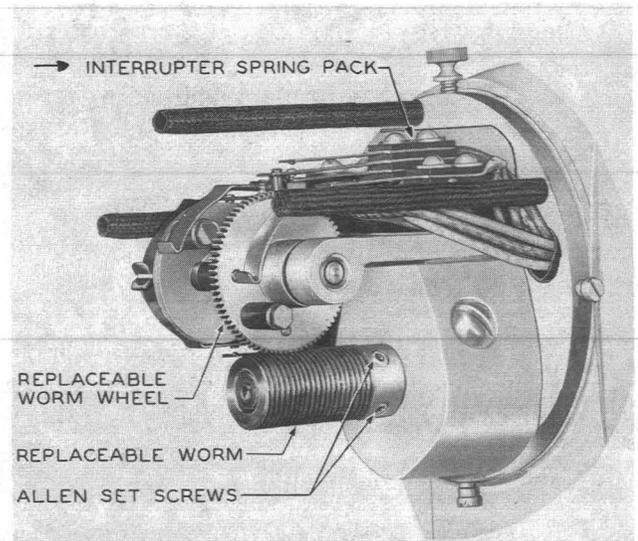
Worm and Worm Wheel (Holtzer-Cabot Machines)
